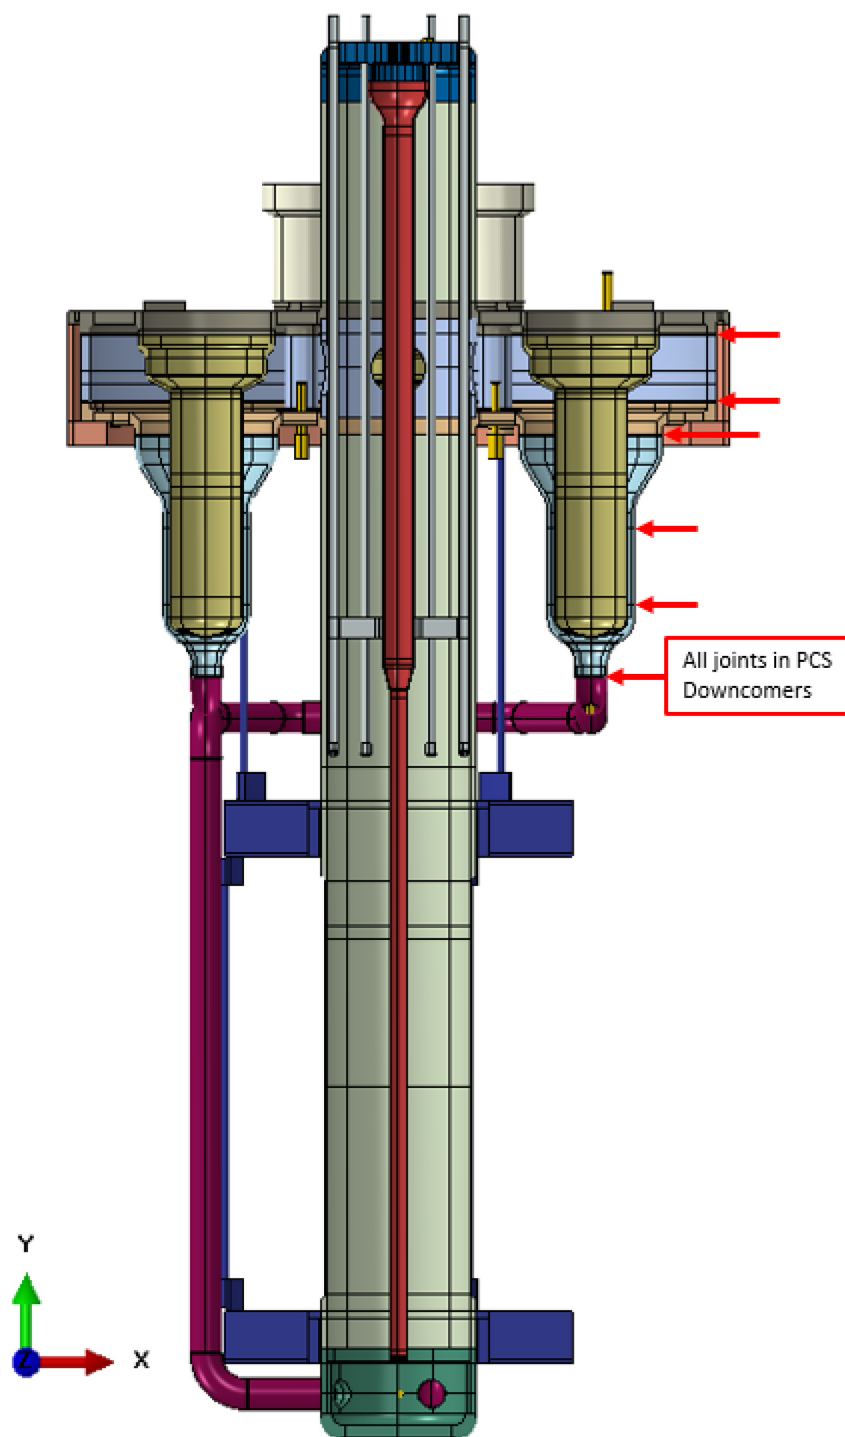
PCS Weld Joints with Inaccessible Roots Modeled per Figure 6
